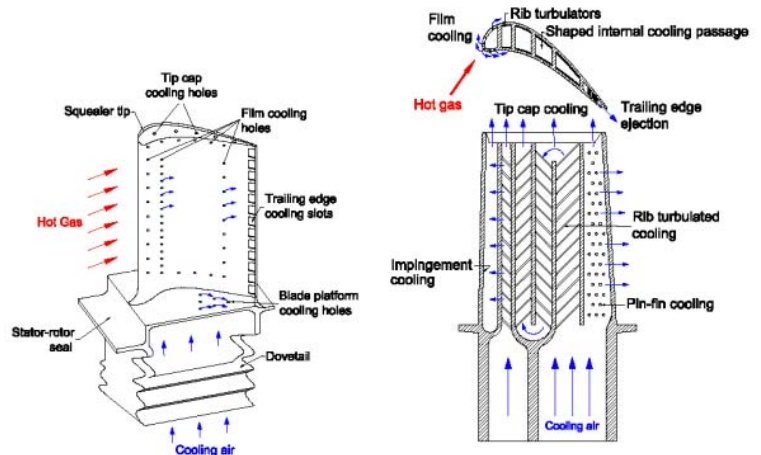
Typical airfoil cooling schemes for high-pressure turbine blade.
